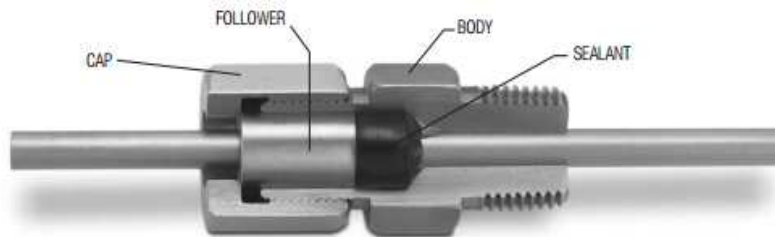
Technical drawing of a Conax gland for the electrode. Pressure rating from vacuum to 10,000 psi.
